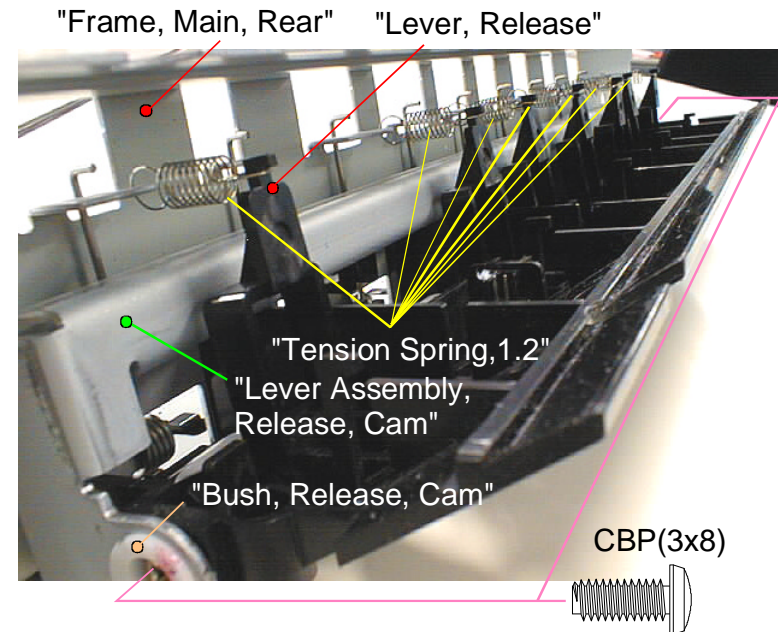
"Tension Spring,1.2", and "Lever Assembly, Release, Cam" Removal
